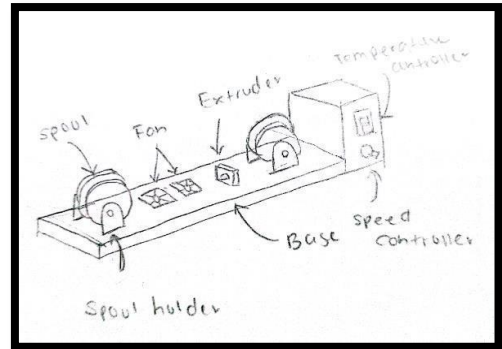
Design 3 (Mechanical parts) for filament extrusion machine
